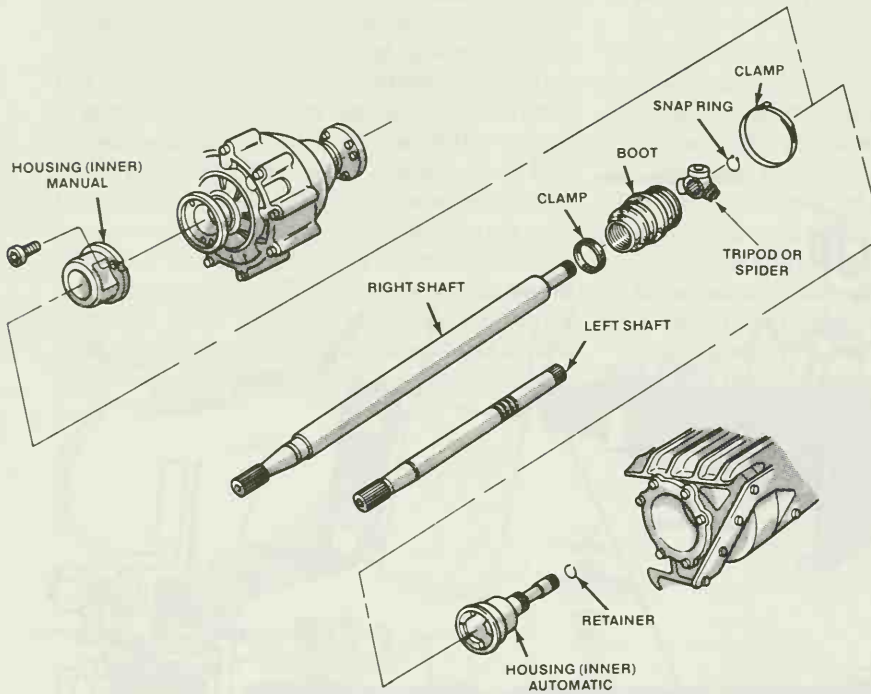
Exploded view of an inboard joint. (Chrysler Corporation)
